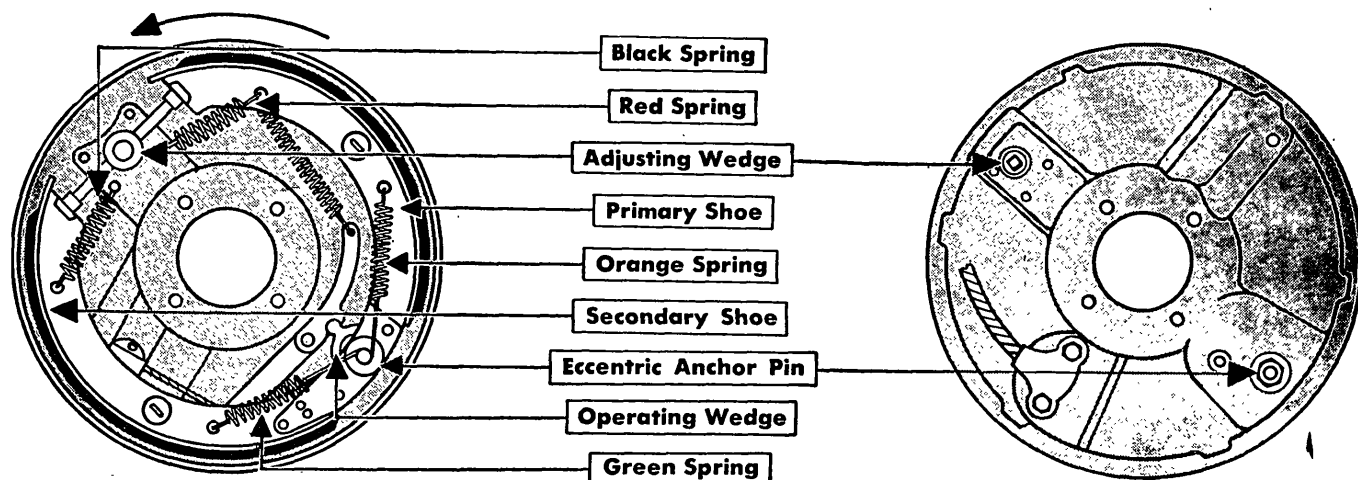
Ford mechanical brake, 1937-38. Diagram shows left rear brake. Note position of colored brake shoe return springs
